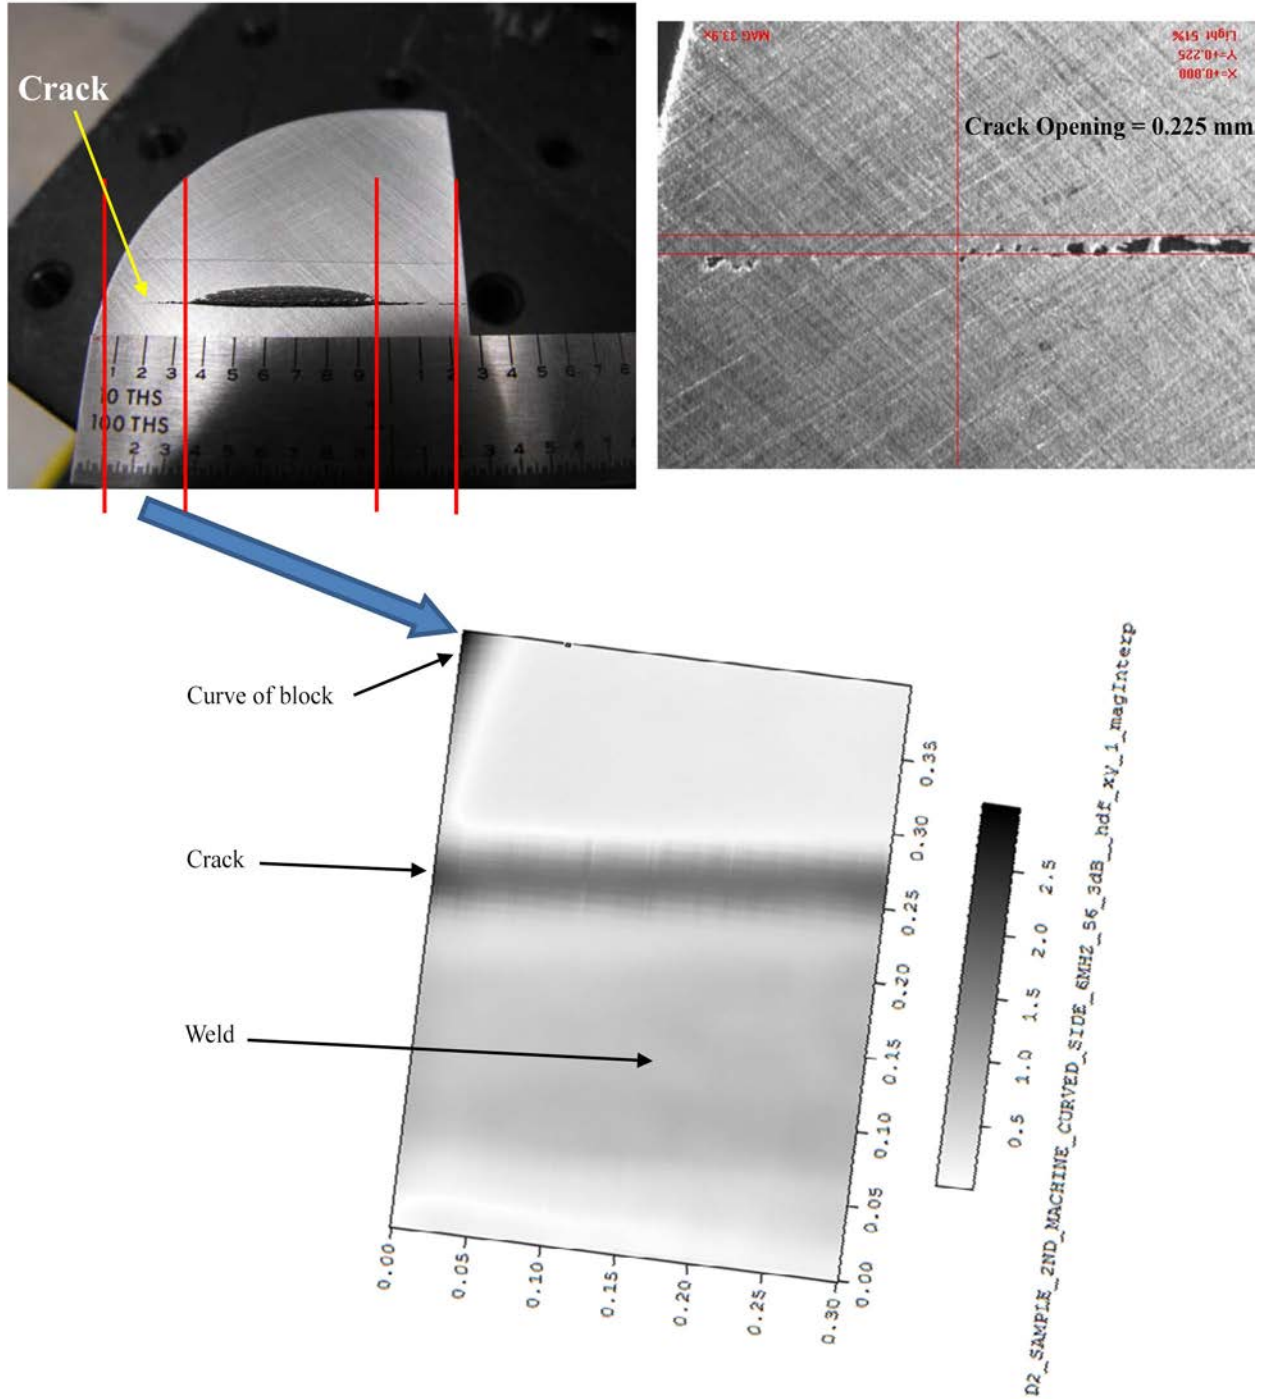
Top Left Image is a Photograph of IGSCC Sample D2; the entire crack as machined to eliminate most of the weld geometry. Top Right Image is a Photograph of the Left Portion that was Eddy Current Scanned, which has a crack opening of 0.225 mm. Bottom is the Eddy Current Scan of the Left Portion of the Crack.
